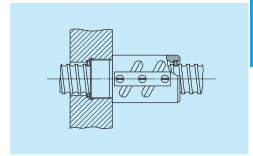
Installation of brush-seal to a ball nut with thread screw
